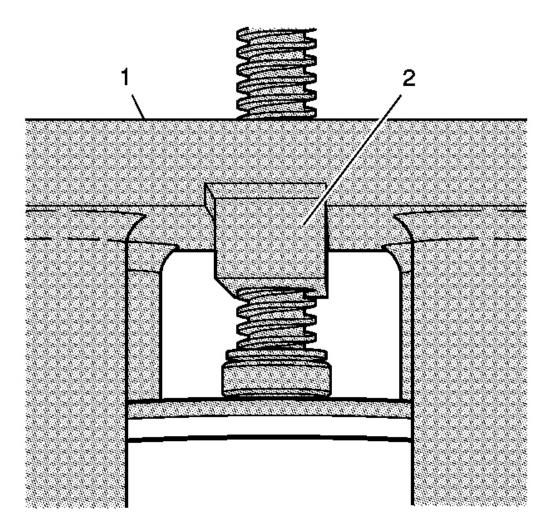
View Of Installation Arbor Courtesy of GENERAL MOTORS CORP.
